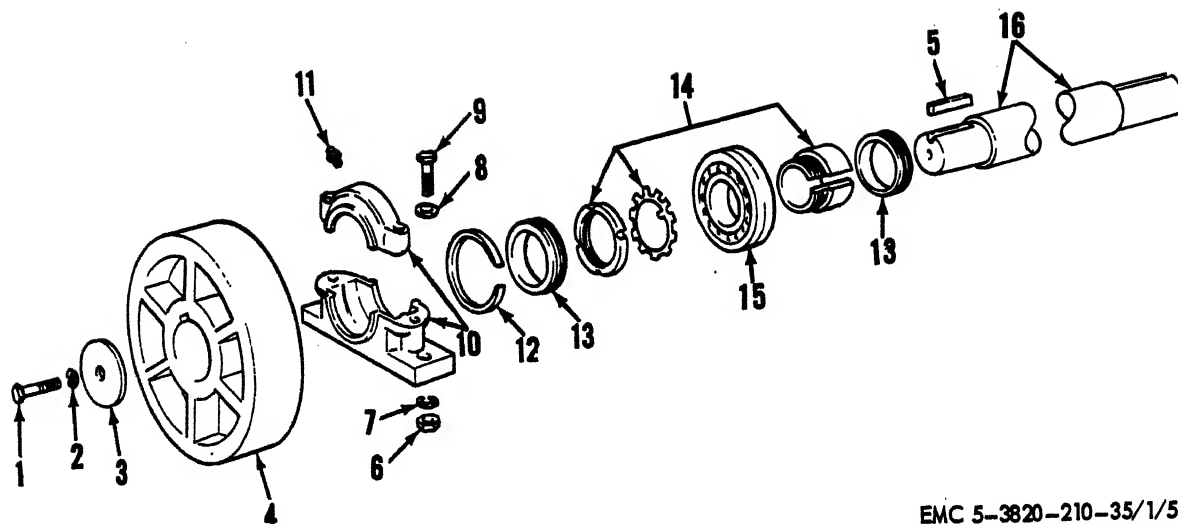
Trunnion roller shaft assembly and thrust roller assembly, removal and installation.
